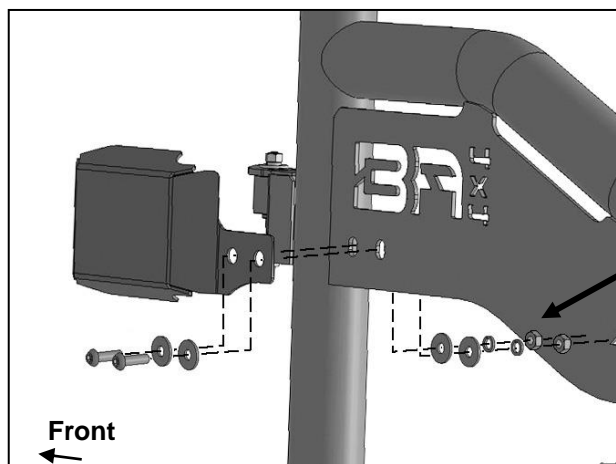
Attach lower Door Mounting Bracket to door mount (arrow, also see Fig 10)
